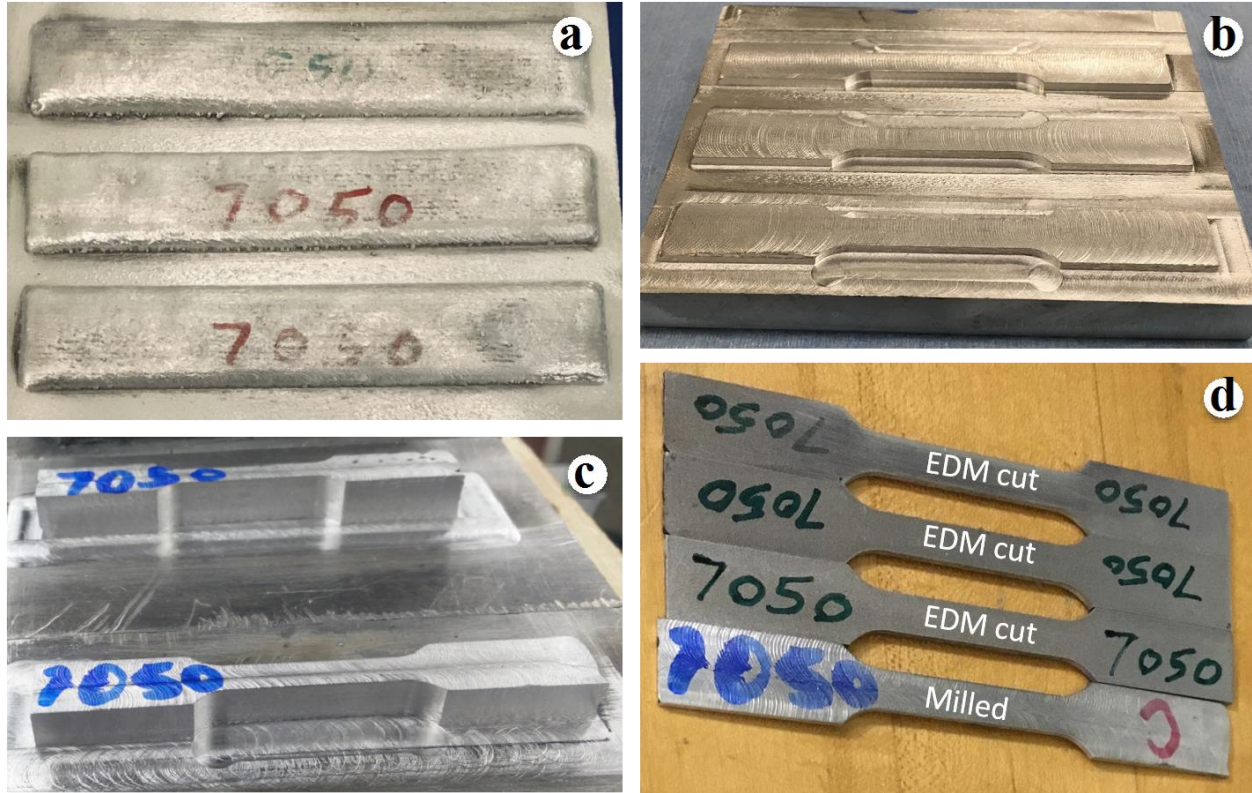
Tensile test samples preparation steps, (a) As-deposited blocks (100 mm × 16 mm × 3 mm), (b) Dog bone shaped samples made by CNC milling, (c) Slicing and reducing the thickness to 2 mm thick, and (d) EDM cut and milled samples.
